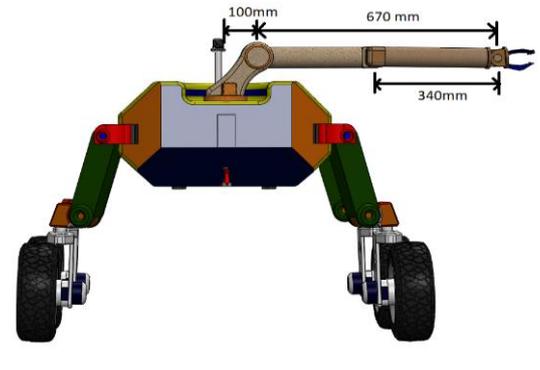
Agricultural robot with 3-Hand jaw dimensions
